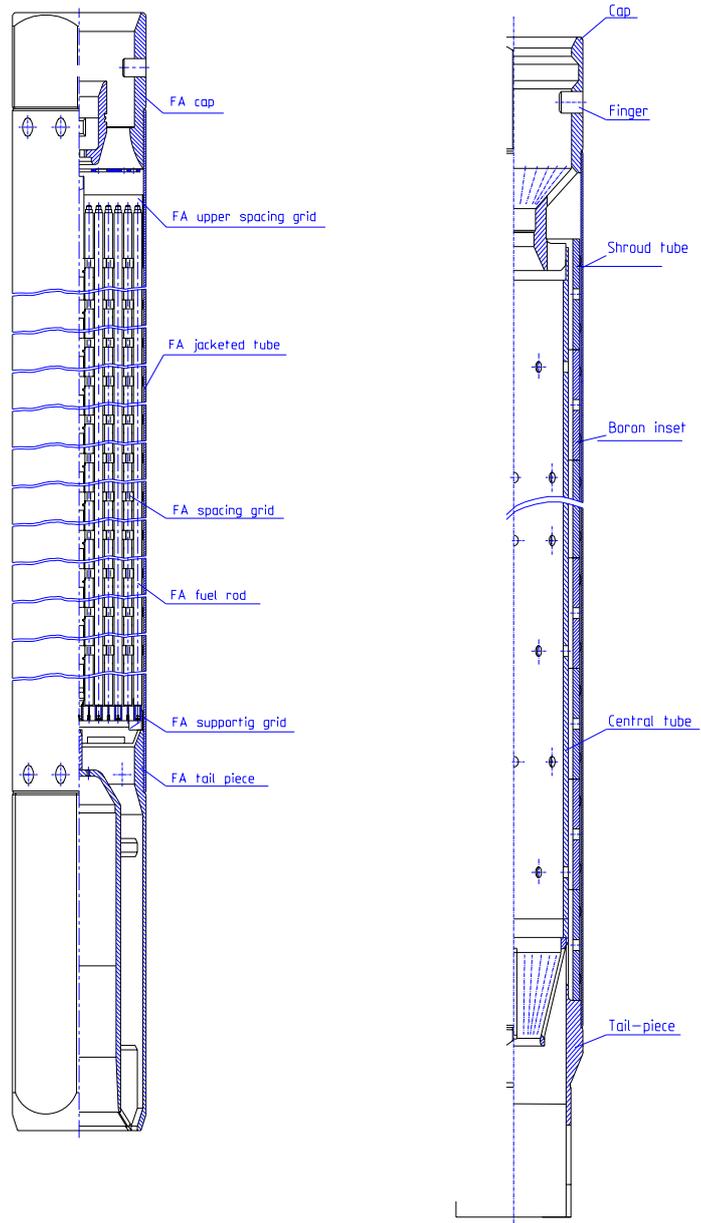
Fuel part of ERC assembly. FIG. 6. Absorber part of ERC assembly.
